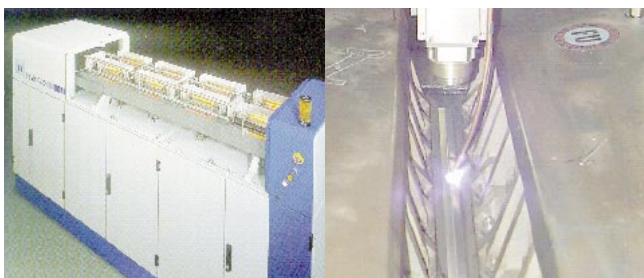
4 kW laser source and set-up with linear fixture for clamping.
